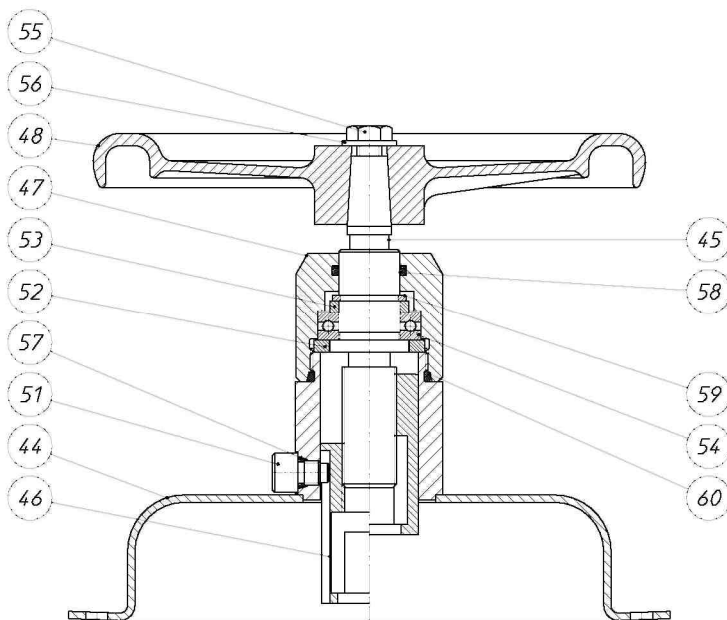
Manual drive unit of type P/R pneumatic actuator
